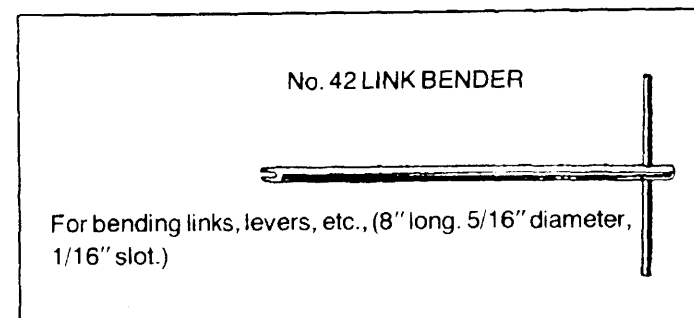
A complete tool set can't be without this tool—the link bender (courtesy of Ames Supply Company).
